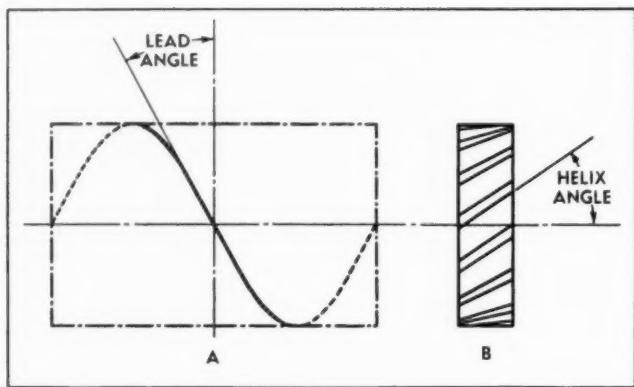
(A) "Lead Angle" of a Screw Thread or Worm; (B) "Helix Angle" of a Helical Gear
